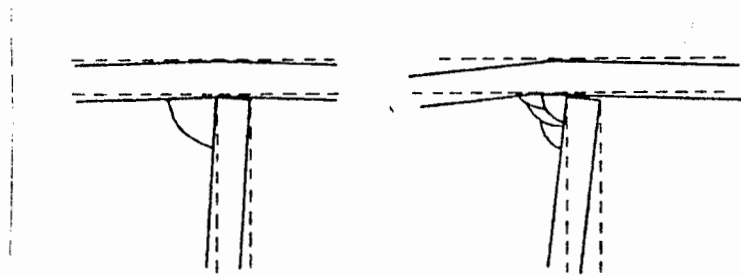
Multi-run angular distortion in a fillet weld
